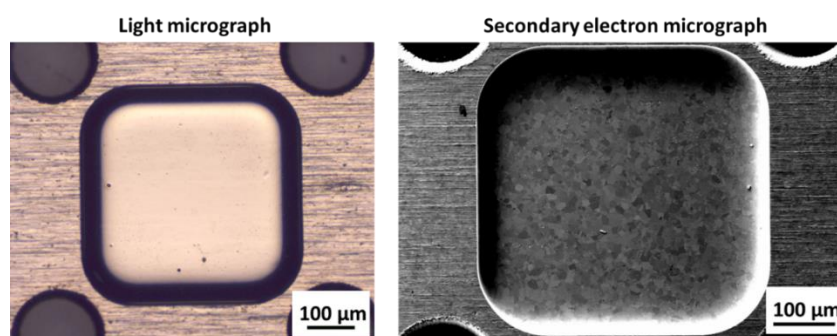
The Mini cruciform of SS304 with ECMM and laser cutting exhibits high surface quality inside the pocket.
